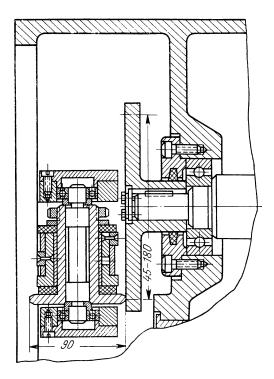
Face roller variable-speed drive of the model KY-39 heavy shaper
